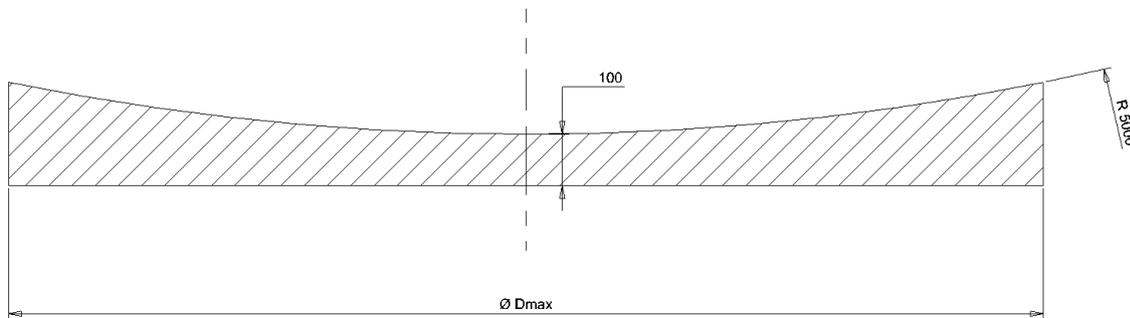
section of piece to be machined for computation of the maximum diameter. Dimension in [mm]
